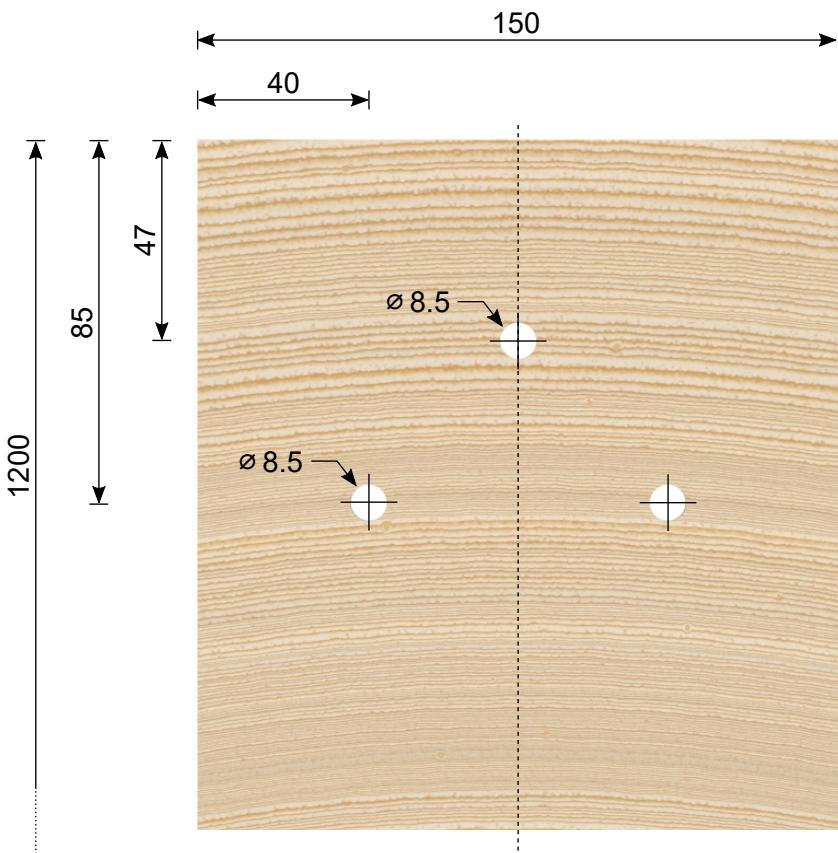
Drill pattern of wood 1, where the bearing will be attached to. All dimensions are in mm.
